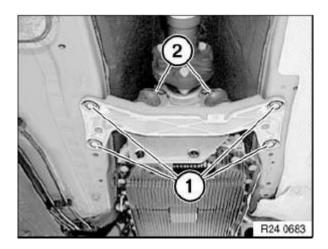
Identifying Transmission Cross-Member Screw And Nut Courtesy of BMW OF NORTH AMERICA, INC.
